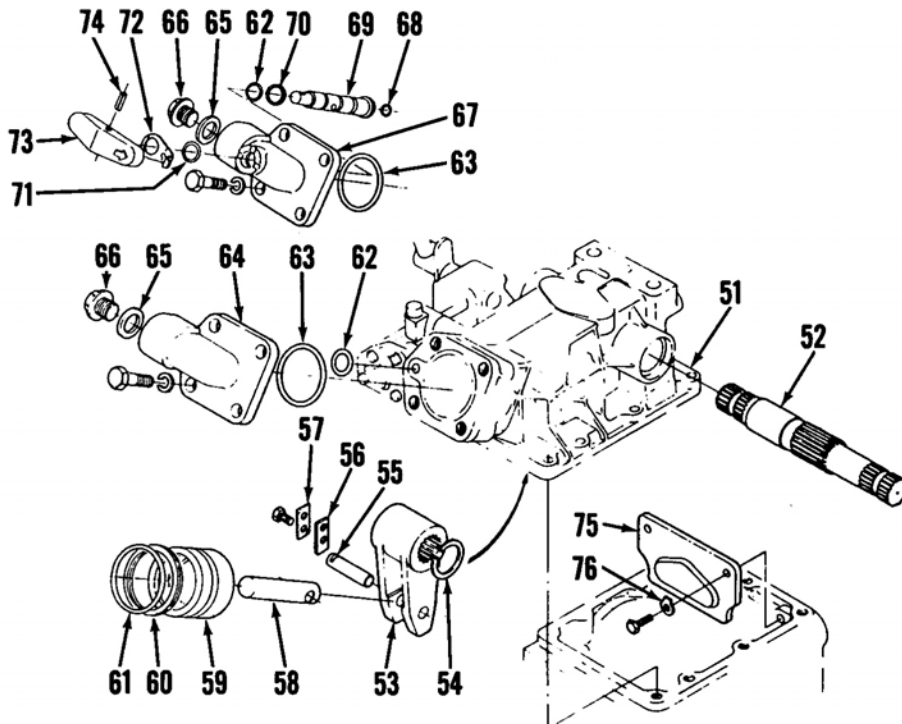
Exploded view of hydraulic cylinder components typical of all models. Diverter valve used on some models is shown at top. On early models, piston (59) is only fitted with “O” ring (61). On later models, piston (59) is fitted with both seal ring (60) and “O” ring (61).
